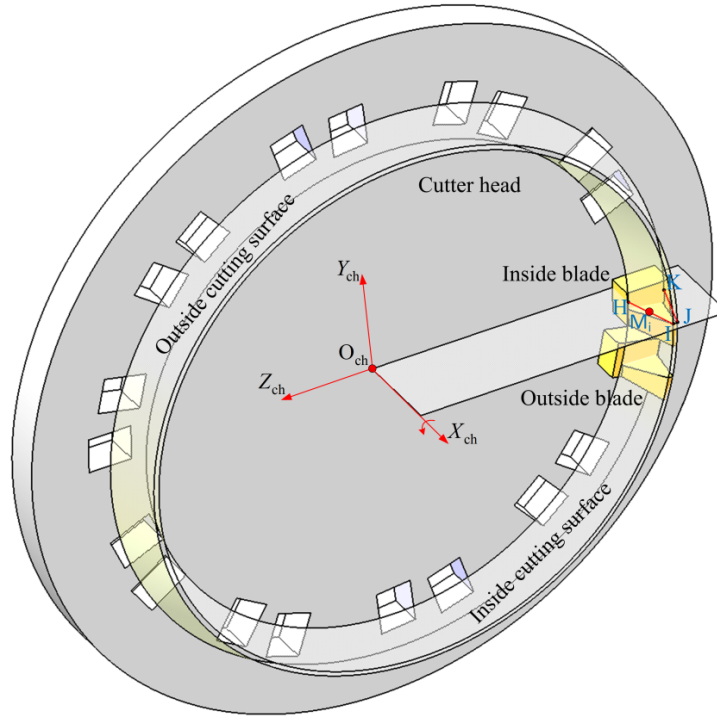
The inside and the outside cutting surfaces of the blades and the mean point M_i on the inside flank of the cutting surface profile.
